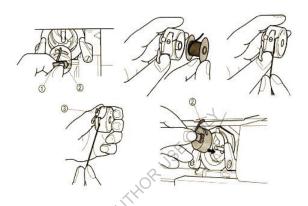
Scheme of tying the bottom thread on a sewing machine type 1022-M
